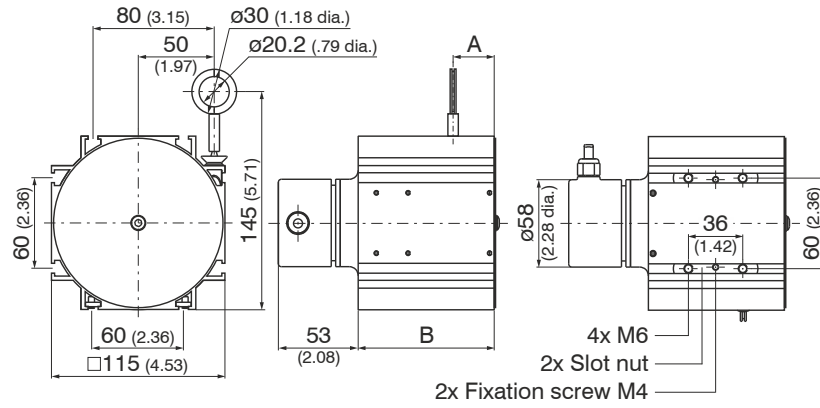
Dimensional drawing ... - FD115 - HTL/TTL, dimensions in mm (inches), not to scale
